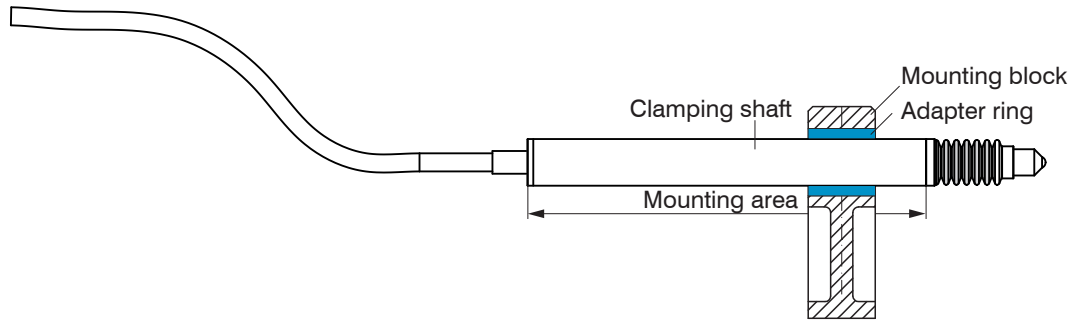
Mounting of gauges with circumferential clamping using the optional MBS12/8 mounting block
